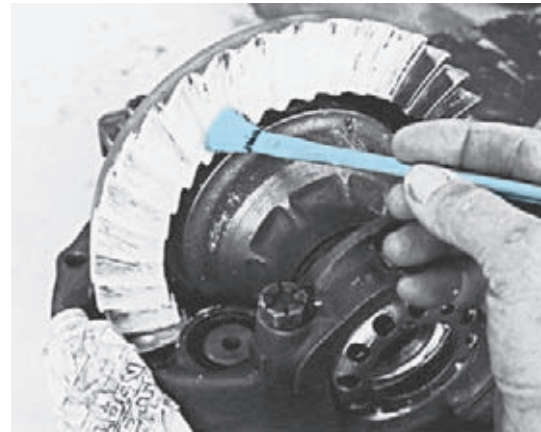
The marking compound should be applied in a very thin coating over the entire gear tooth.
